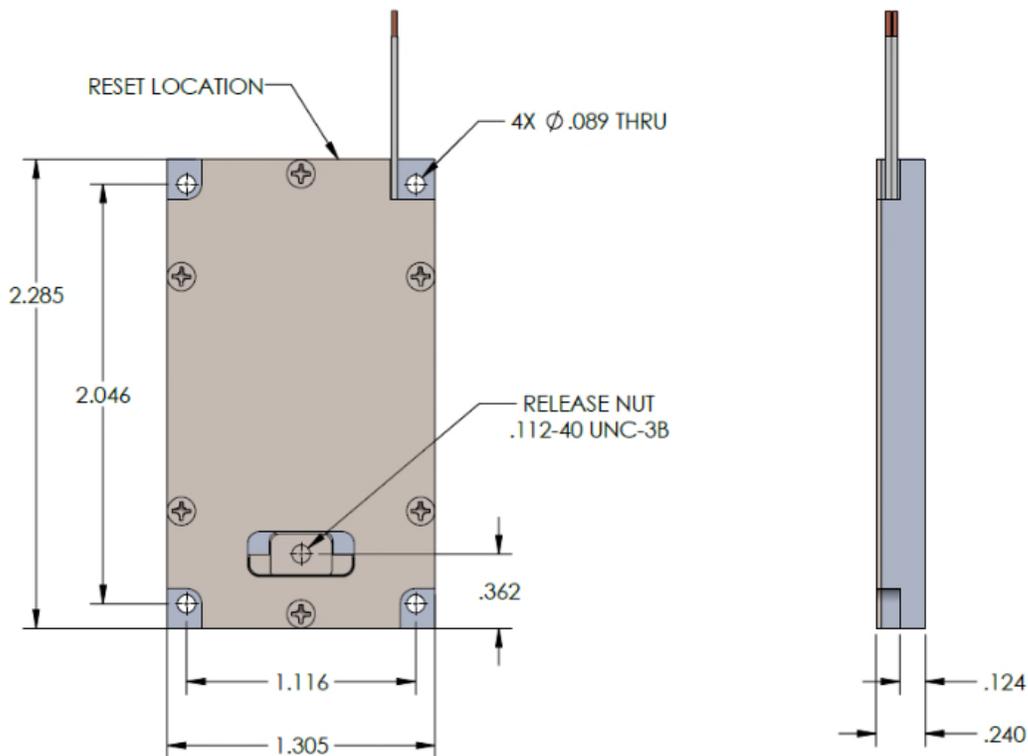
EBAD Thin Pack (TH50) Interface Dimensions
